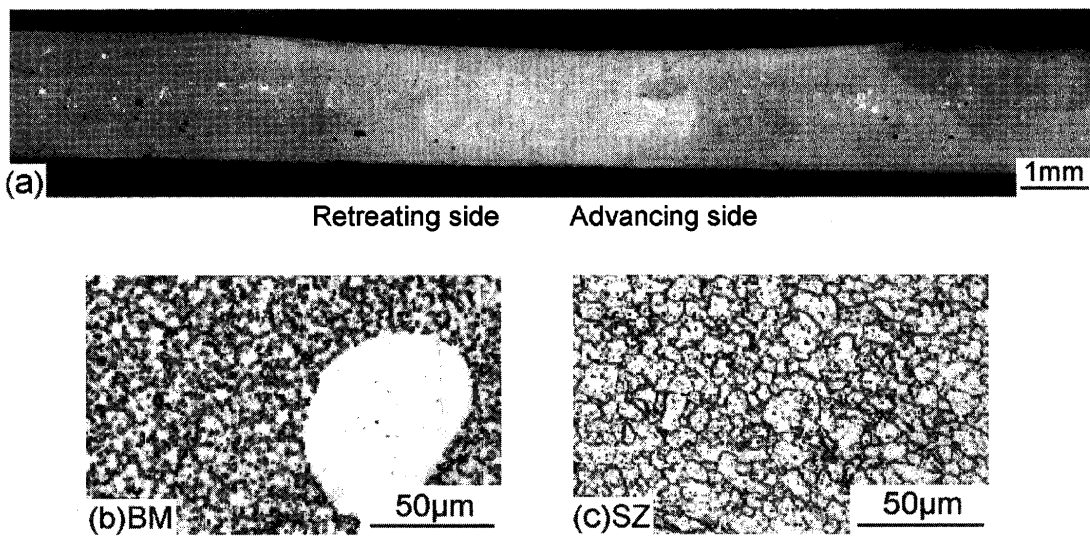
Microstructure of cross section of FSW joint of thixomolded AZ91D Mg alloy sheet; tool rotation speed 1750rpm, travel speed 50 mm/min⁷⁾.
